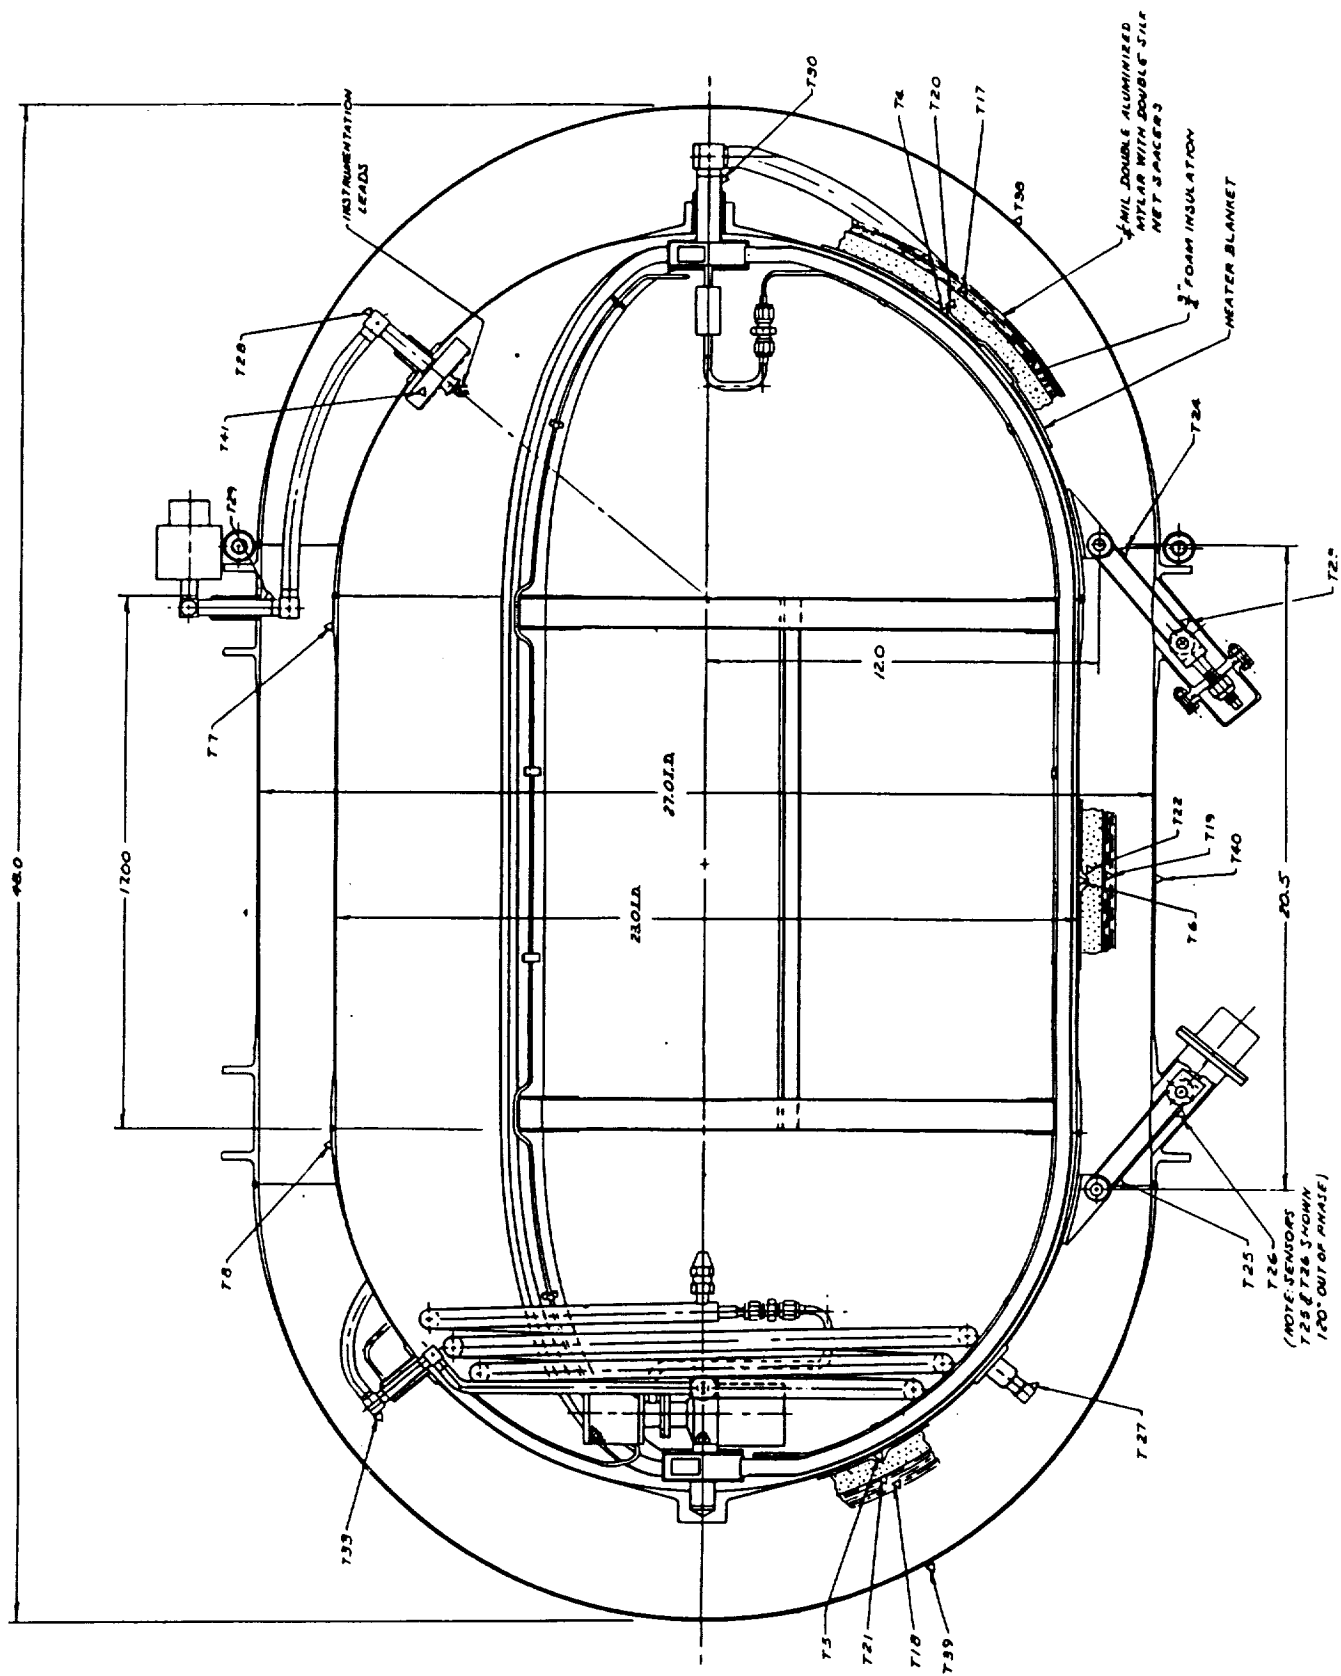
LN2 Storage Tank Layout Drawing
